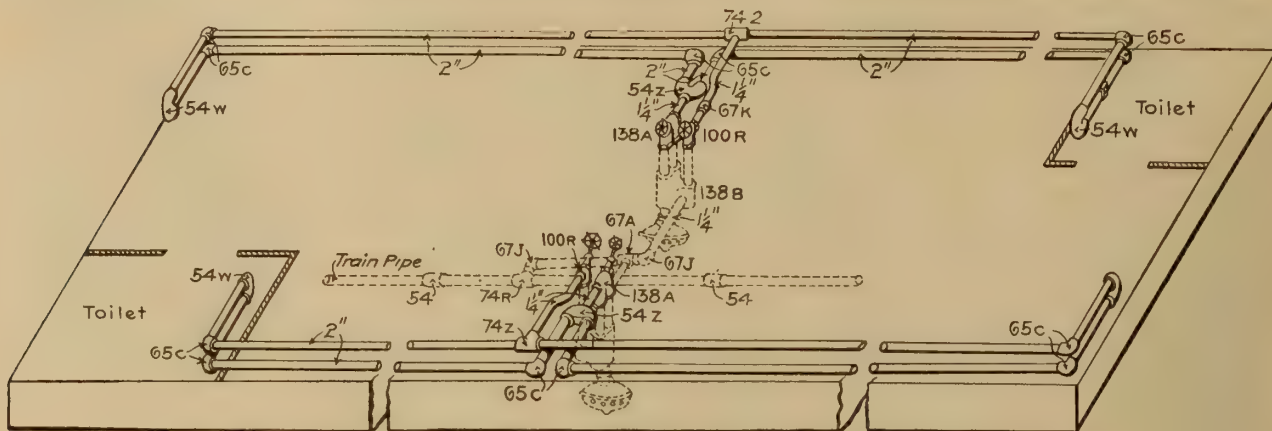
PLAN OF PIPING. STANDARD DIRECT STEAM SYSTEM WITH 2 TRAPS, No. 138.
